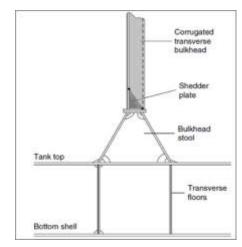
Weld Detail of the corrugated bulkhead
